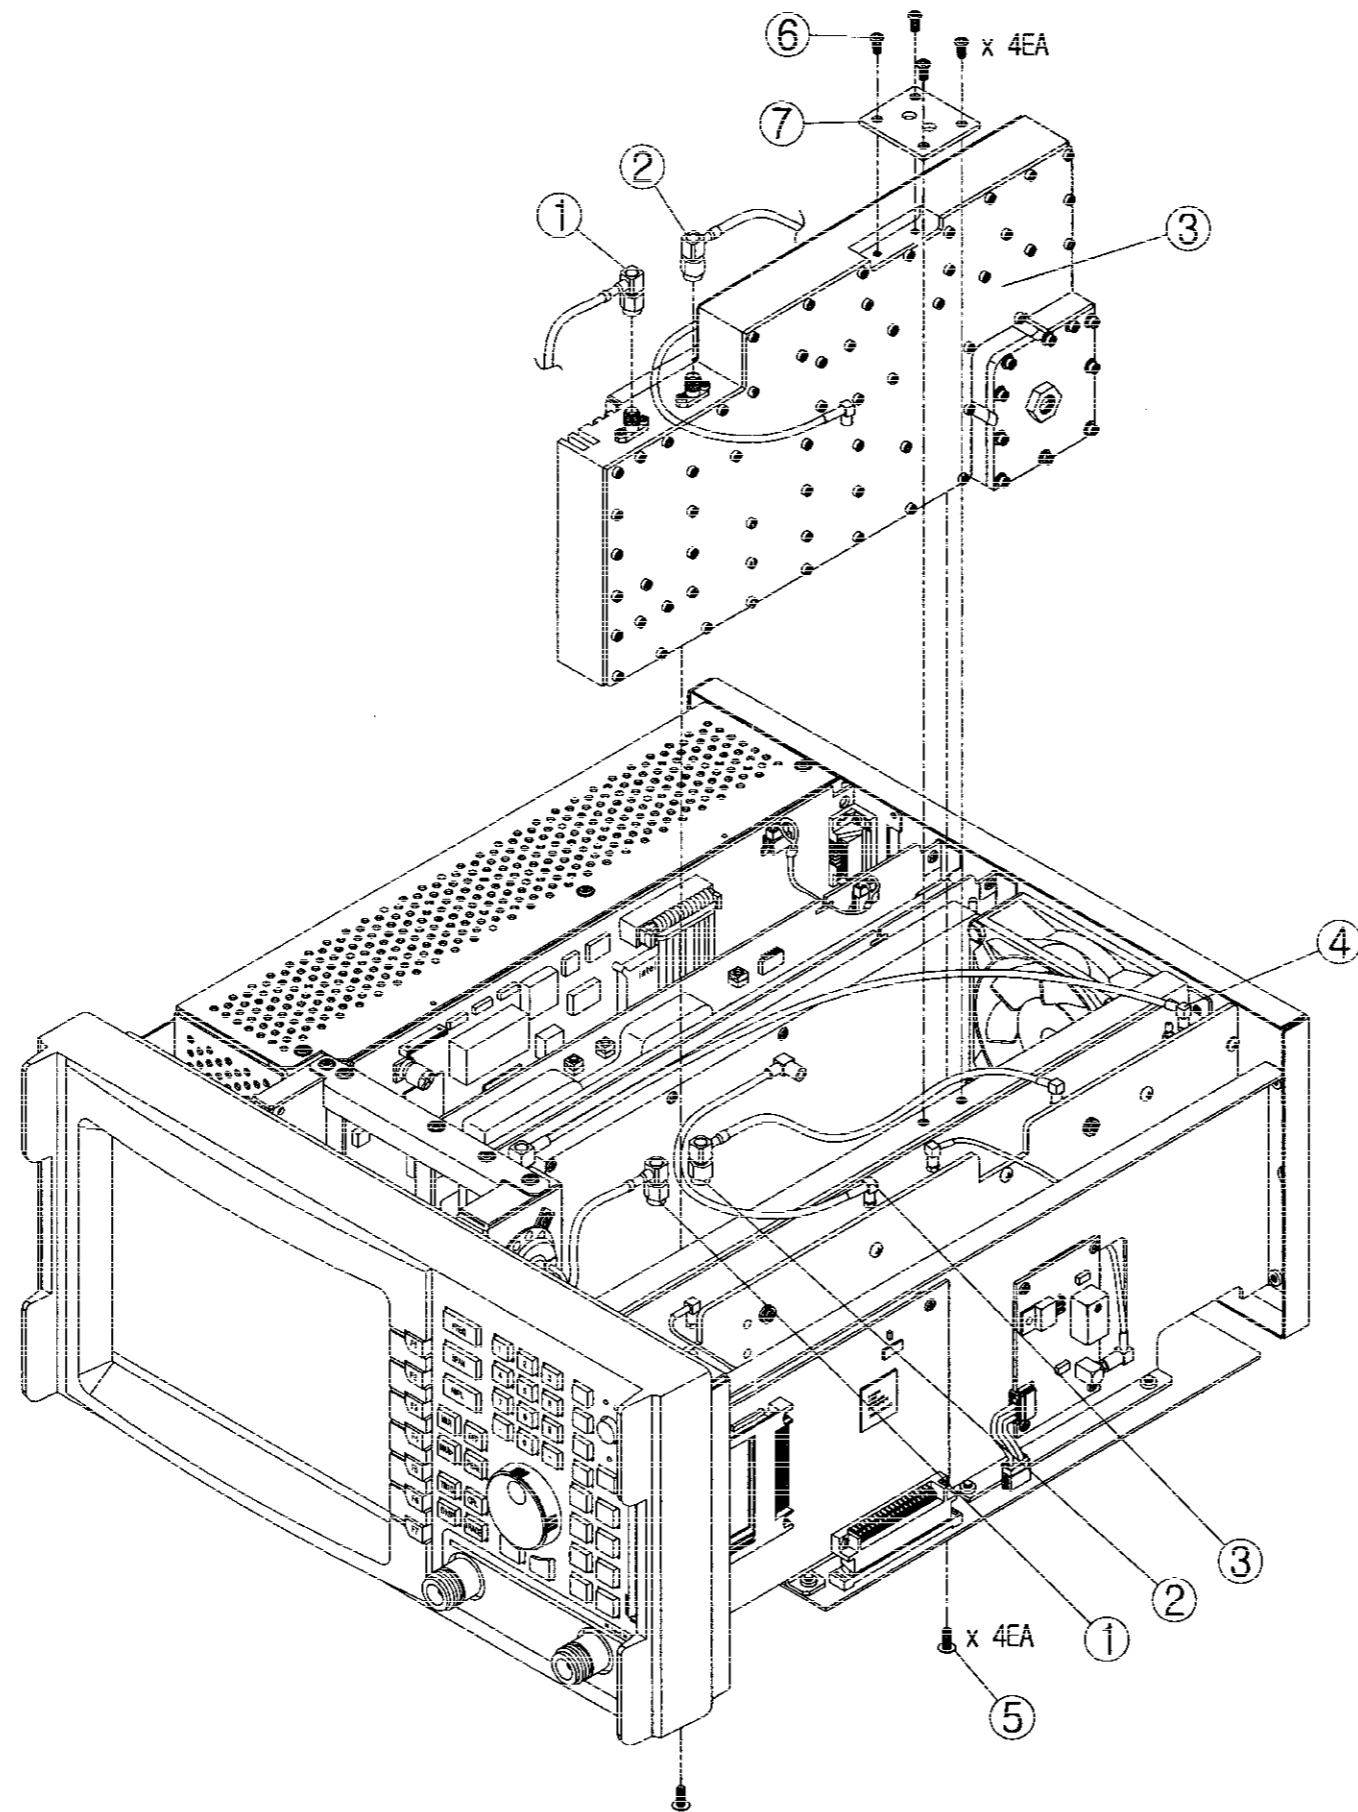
TRACKING GENERATOR MODULE ASSEMBLY (OPTION)
